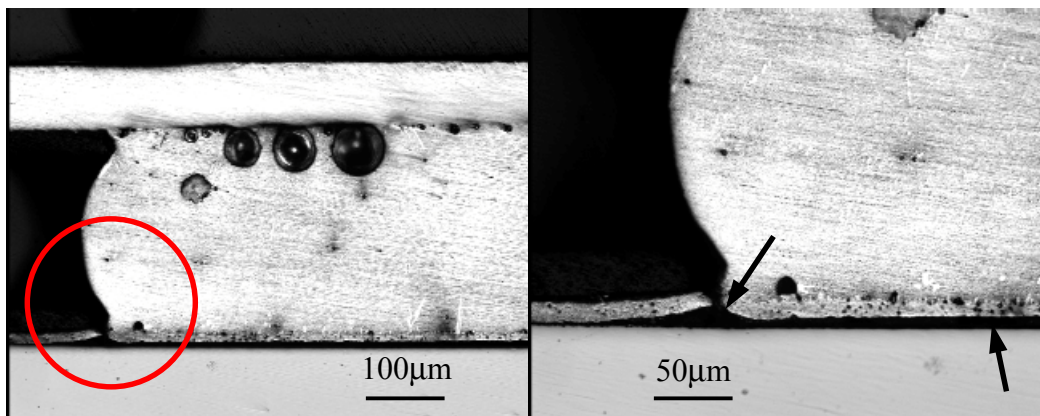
(a) Ag3.5-Sn96.5 CCB solder joint after 400 thermal cycles; and (b) the zoomed-in view of the circled region.
